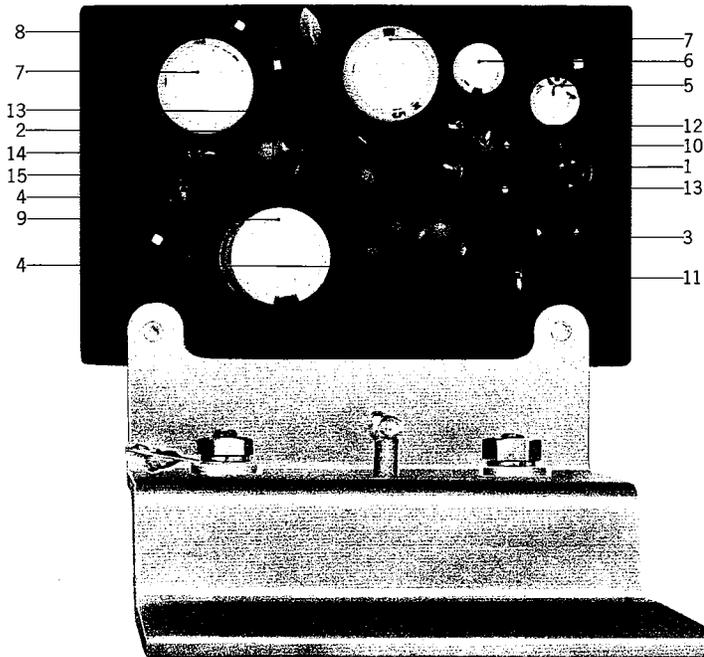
PHOTO OF V. OUT. P.C. BOARD (Y-300)
